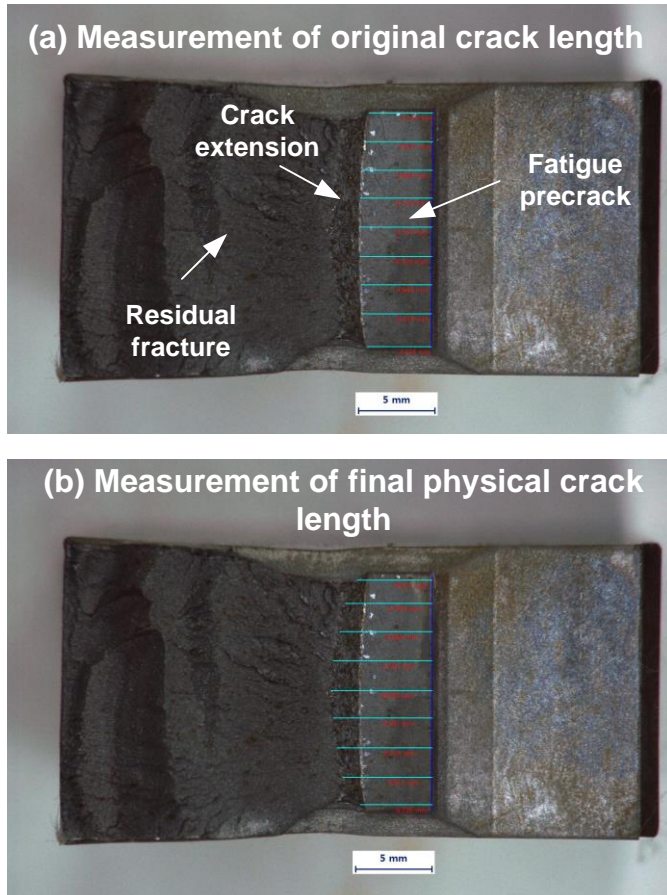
Optical crack size measurement for SCM 21 and API X100: (a) original crack length and (b) final physical crack length
